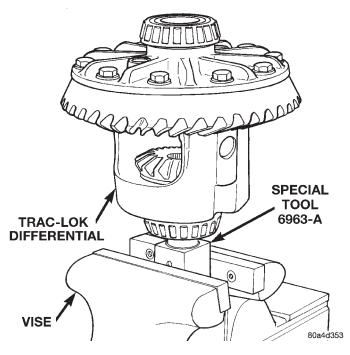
Side Gear Holding Tool 6963-A RING GEAR INSTALLATION
